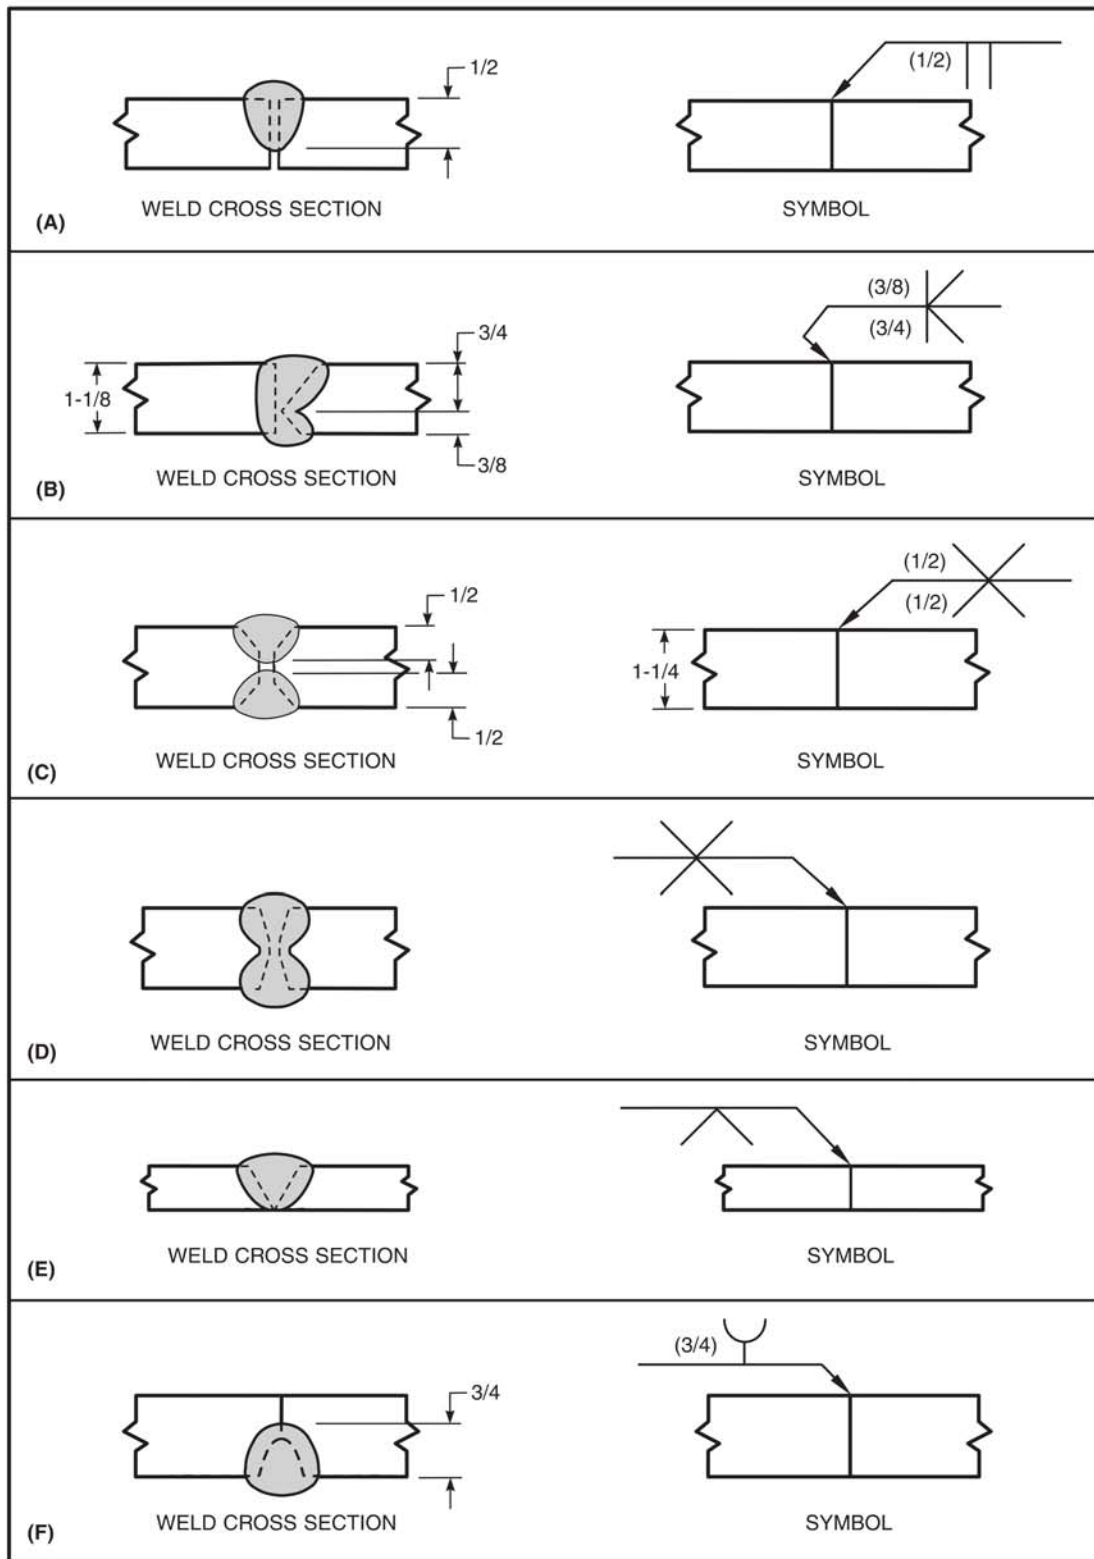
Application of Groove Weld Size, Groove Depth Not Specified
